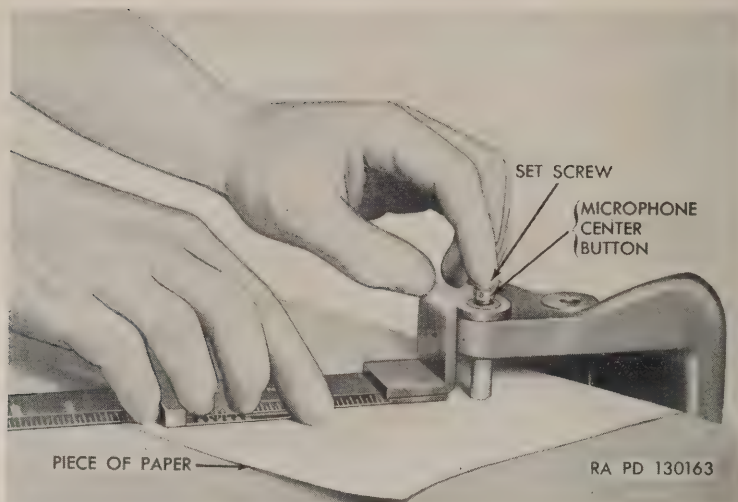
Testing microphone center point assembly—sound-ranging plotting board M1 or M1A1.
